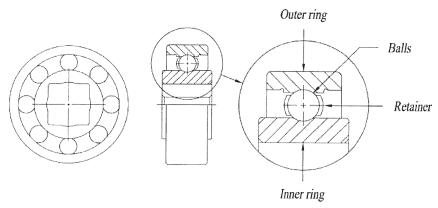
Basic PEER agricultural ball bearing components. Shown: PEER square bore bearing.
